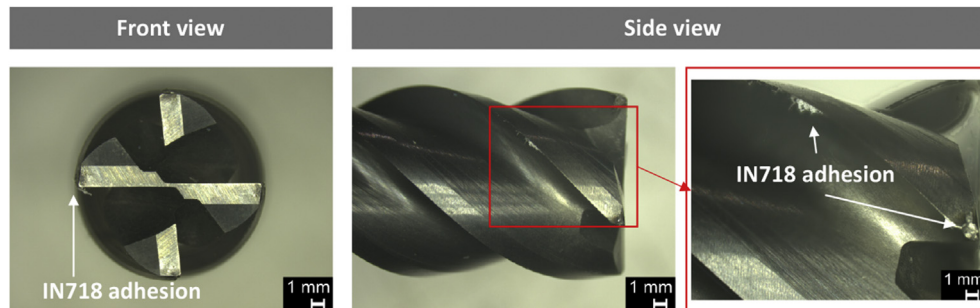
Tool state after machining a slot ($V_c = 60$ m/s; machining direction: Z axis).
